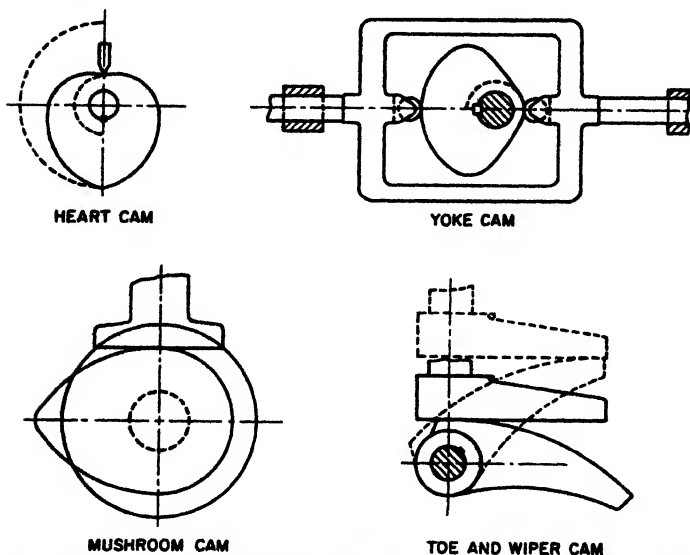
Four types of cams that can be milled using an index head and a vertical attachment. (*The American Machinist*)
